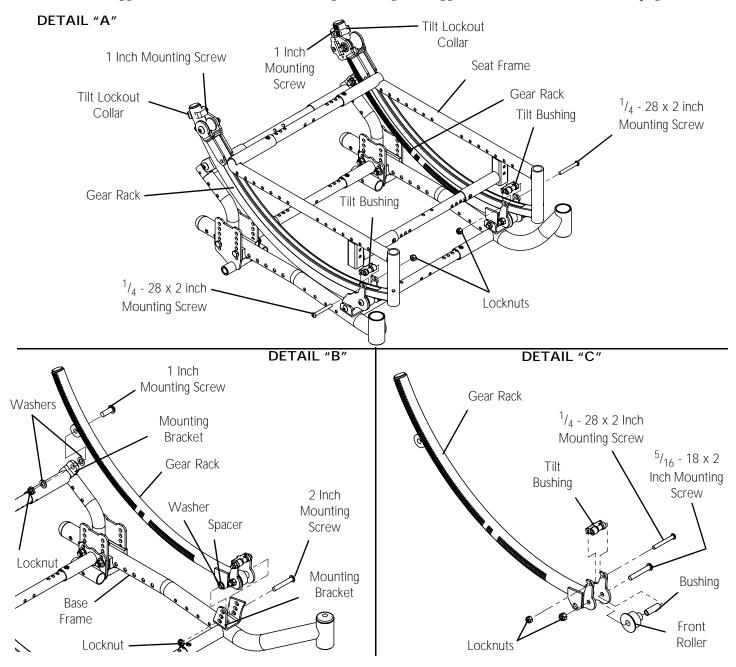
Installing Gear Rack for 12-16 inch Deep Seat Frames
